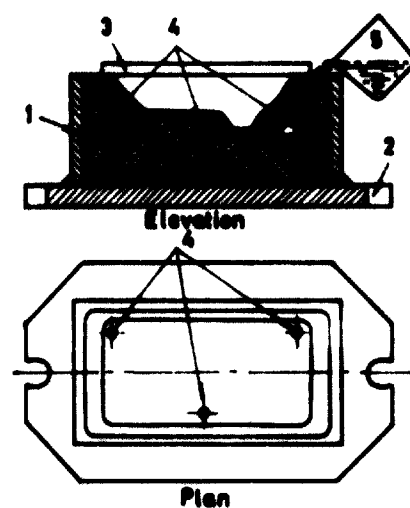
Casting of the mounting surface (seating) of a machine-tool jig, using a prototype as a moulding core
